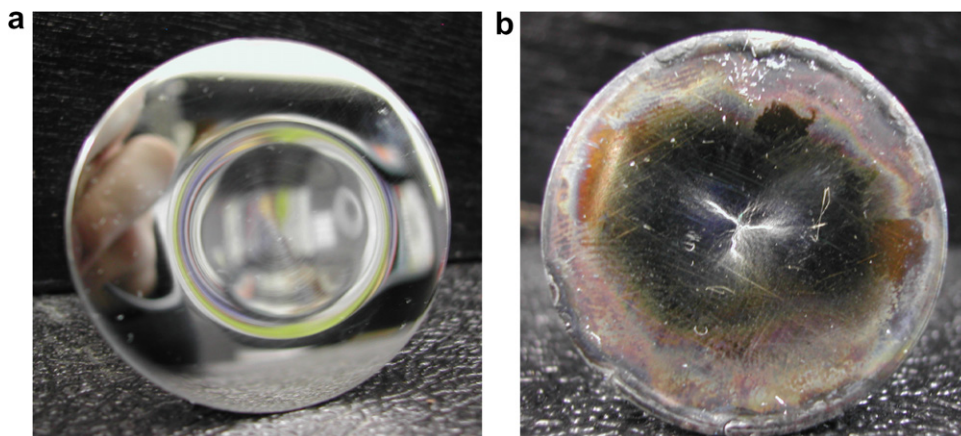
The sample before the welding test (a) and after the welding test (b).
